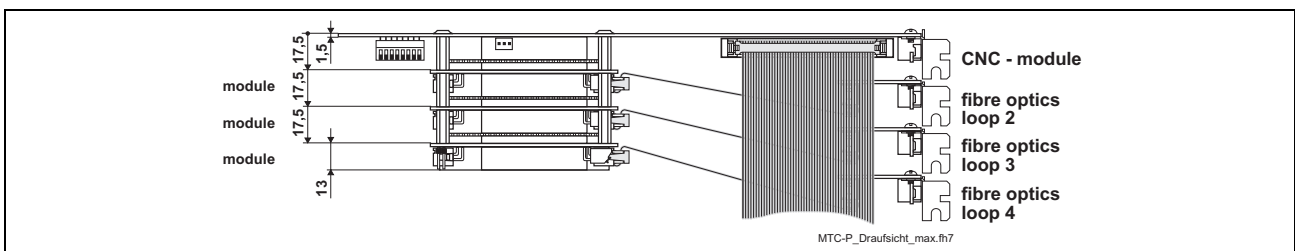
Dimensions of MTC-P01.2 with axis processor modules: Top view
